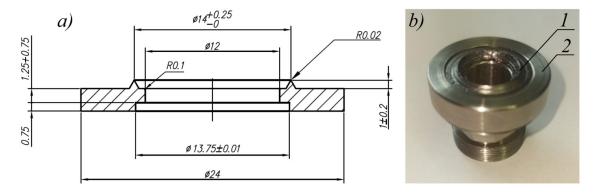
Drawing of cathode with the new geometry (a) and photograph of this cathode (1) mounted in the holder (2) (b)
